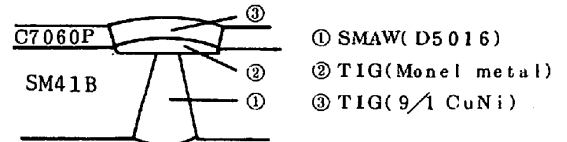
Welding procedure of Cu alloy clad steel
